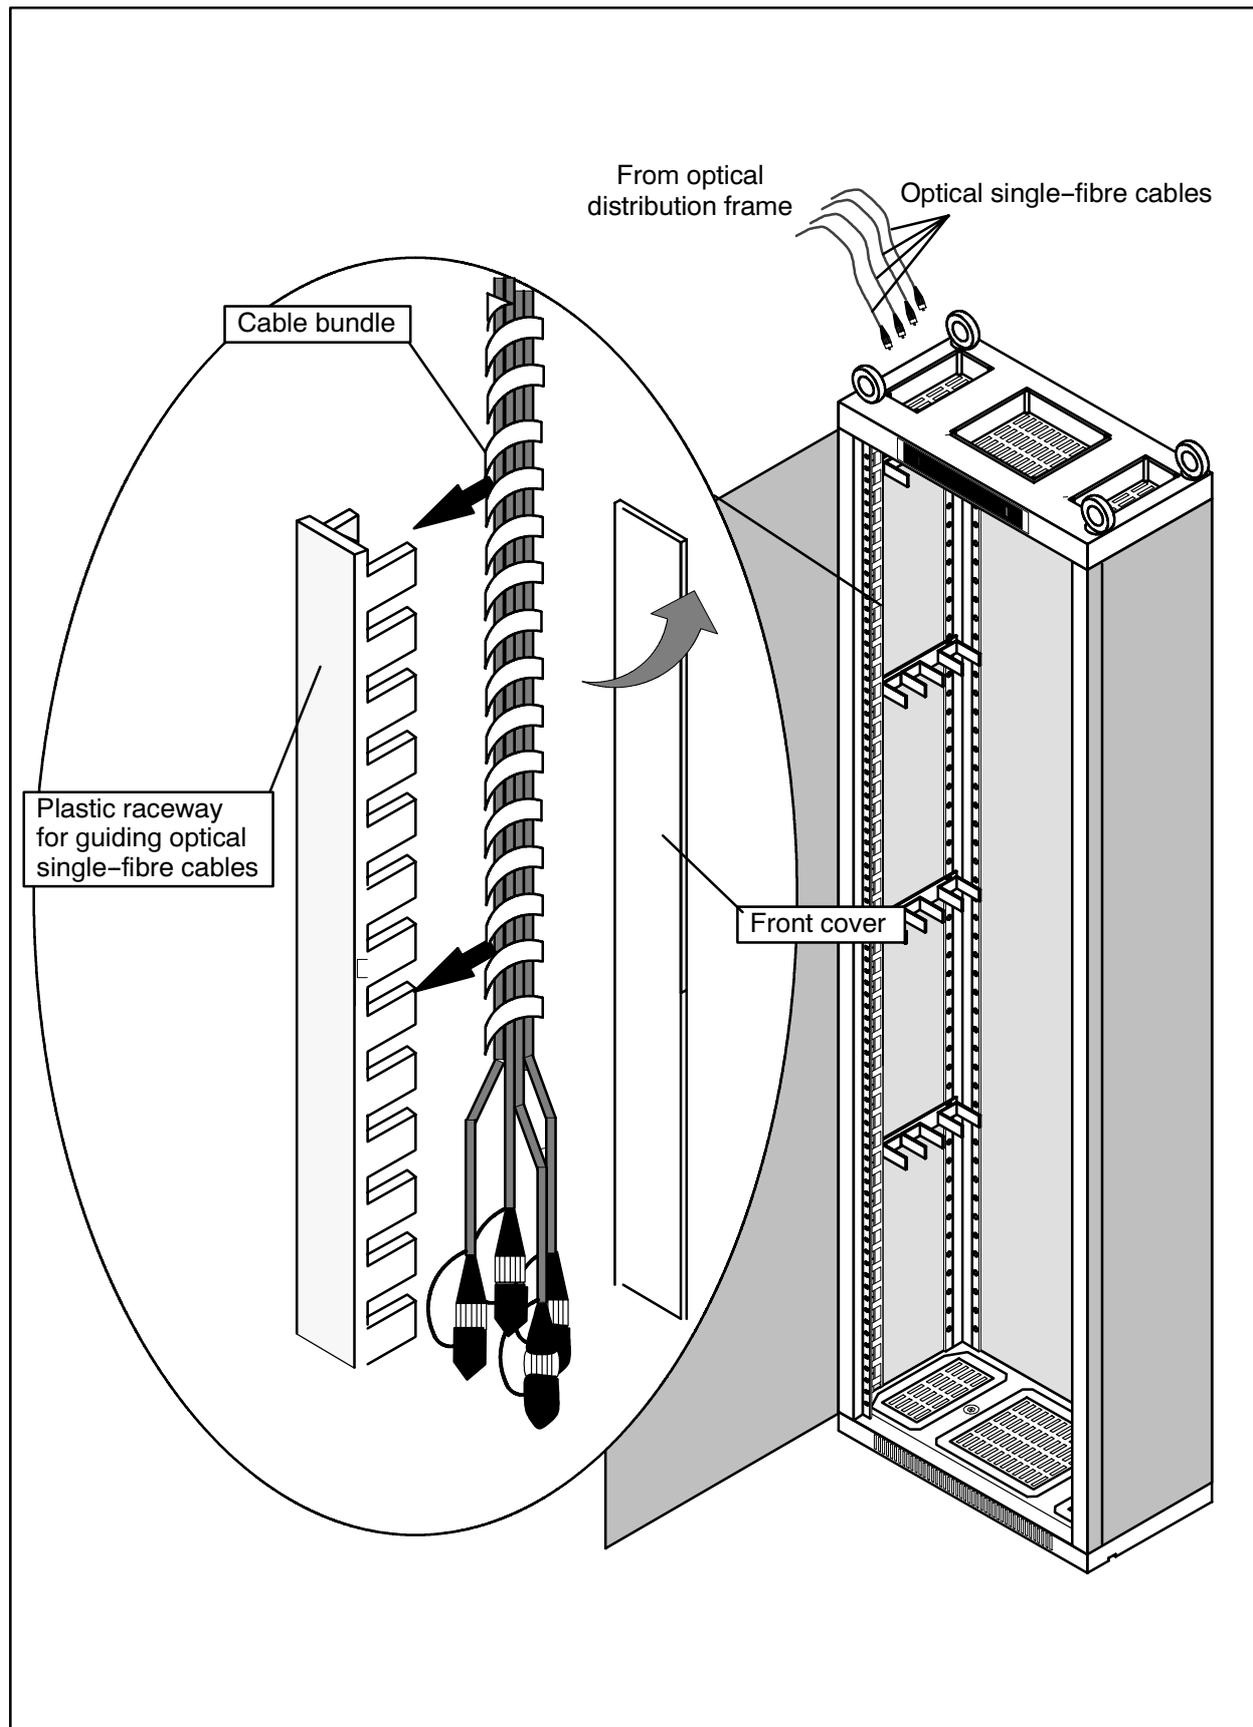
Installation of optical single-fibre cables – entry through top opening
